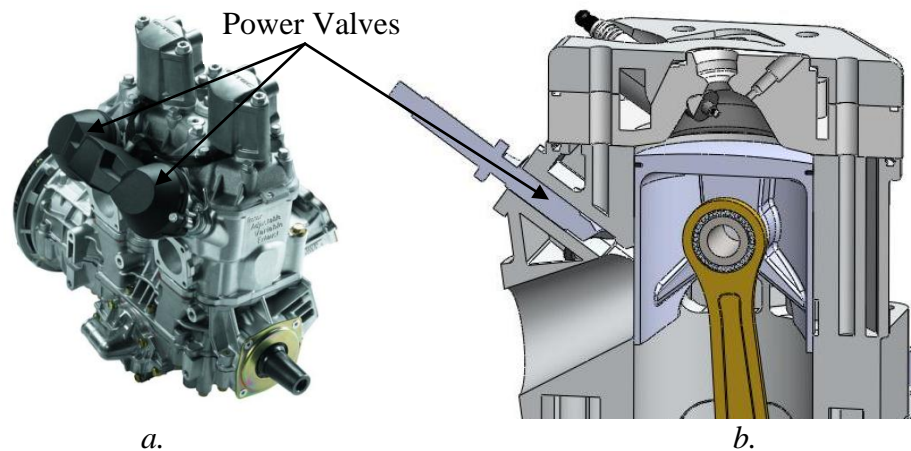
Stock Rotax 600cc Engine- a. Stock Rotax 600cc E-TEC b. Section View Showing Power Valve [12]
